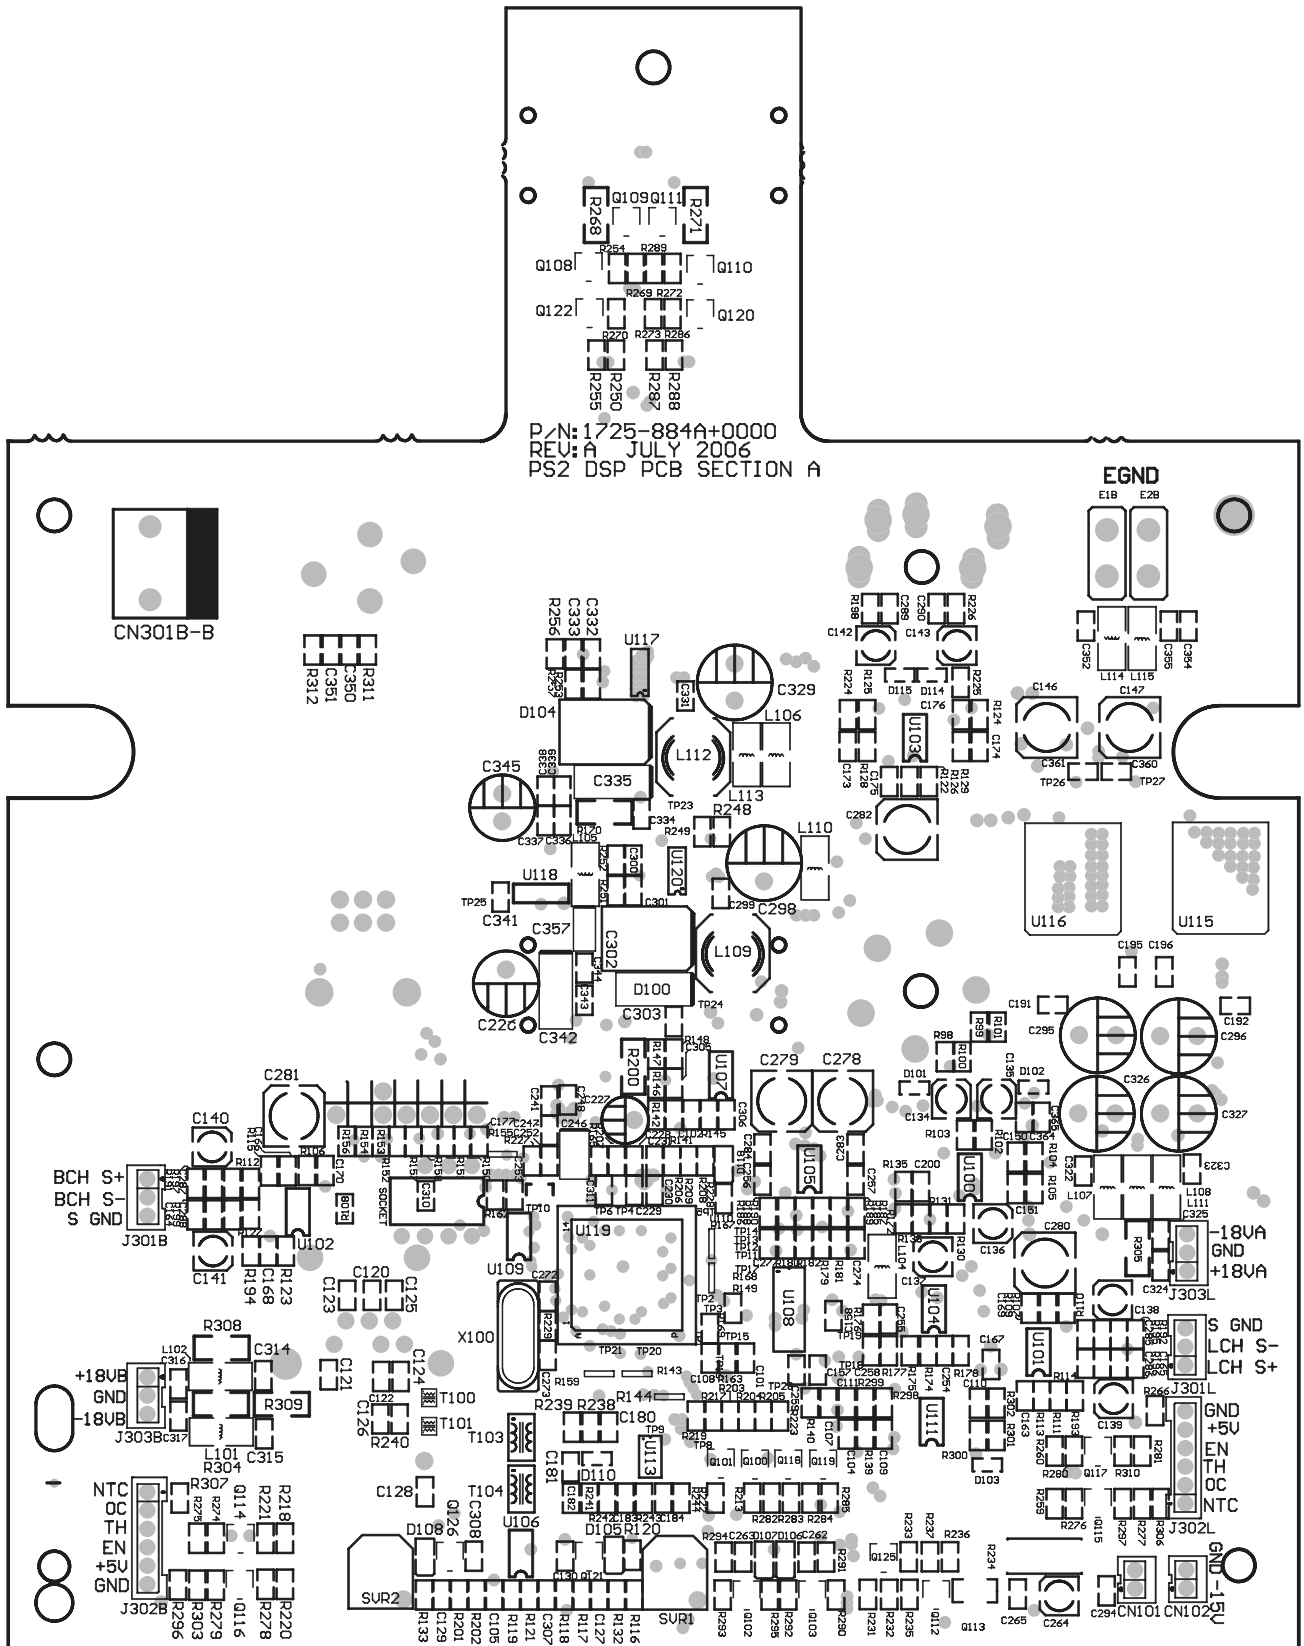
DSP PCB Bottom Silk and Internal Layer 2
